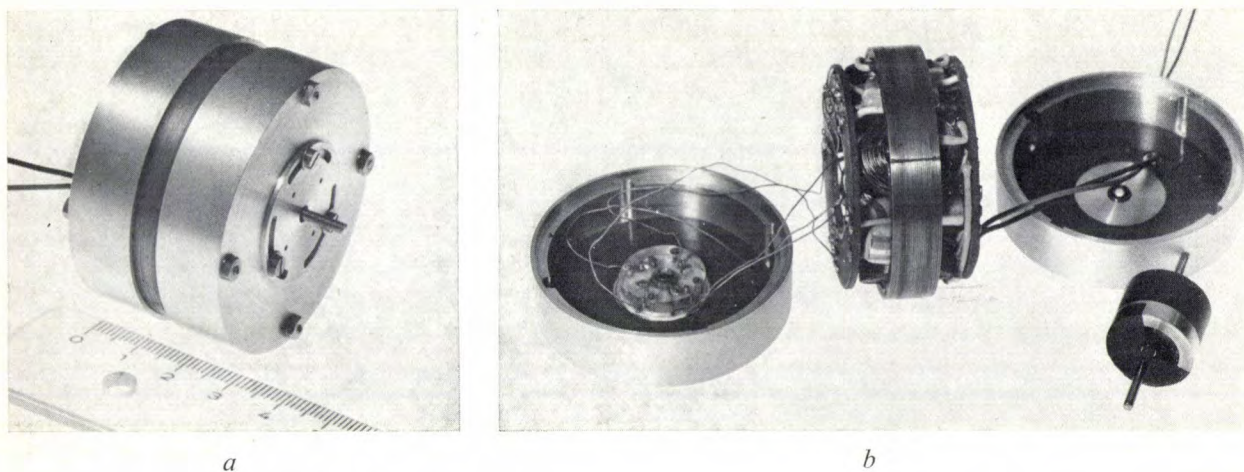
a*) Experimental version of the brushless d.c. motor. *b*) The motor before assembly. The stator is at the centre; the plates fixed at each end of it carry all the electronic circuits (figs. 4, 6 and 8). The rotor is at the front on the right.
